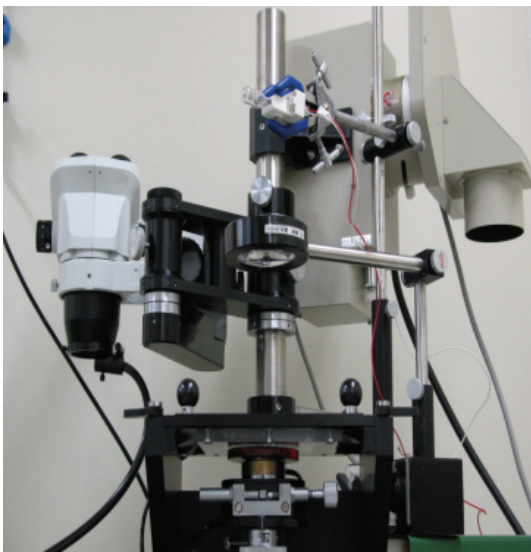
Chip mounting alignment machine converted from mask aligner.
